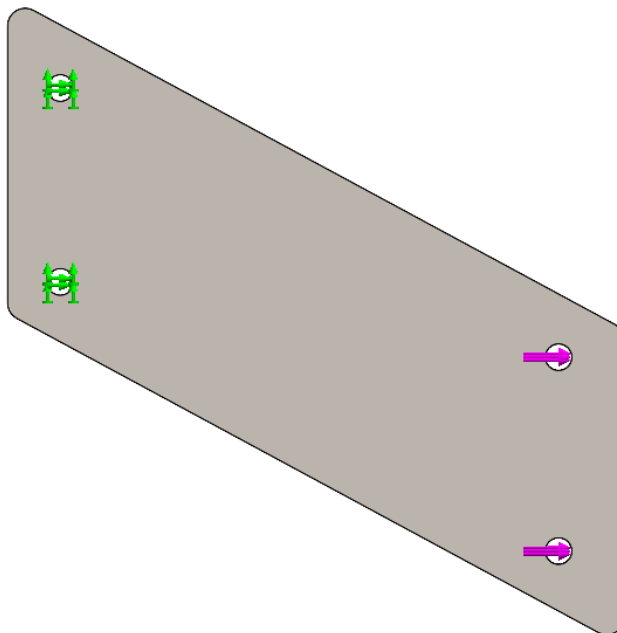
BRACKET 5 FIXTURES AND LOADING CONDITIONS.
